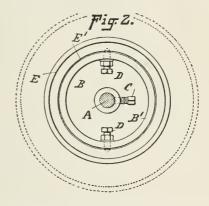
is a longitudinal section, and Fig. 2 an end elevation of this drum.
